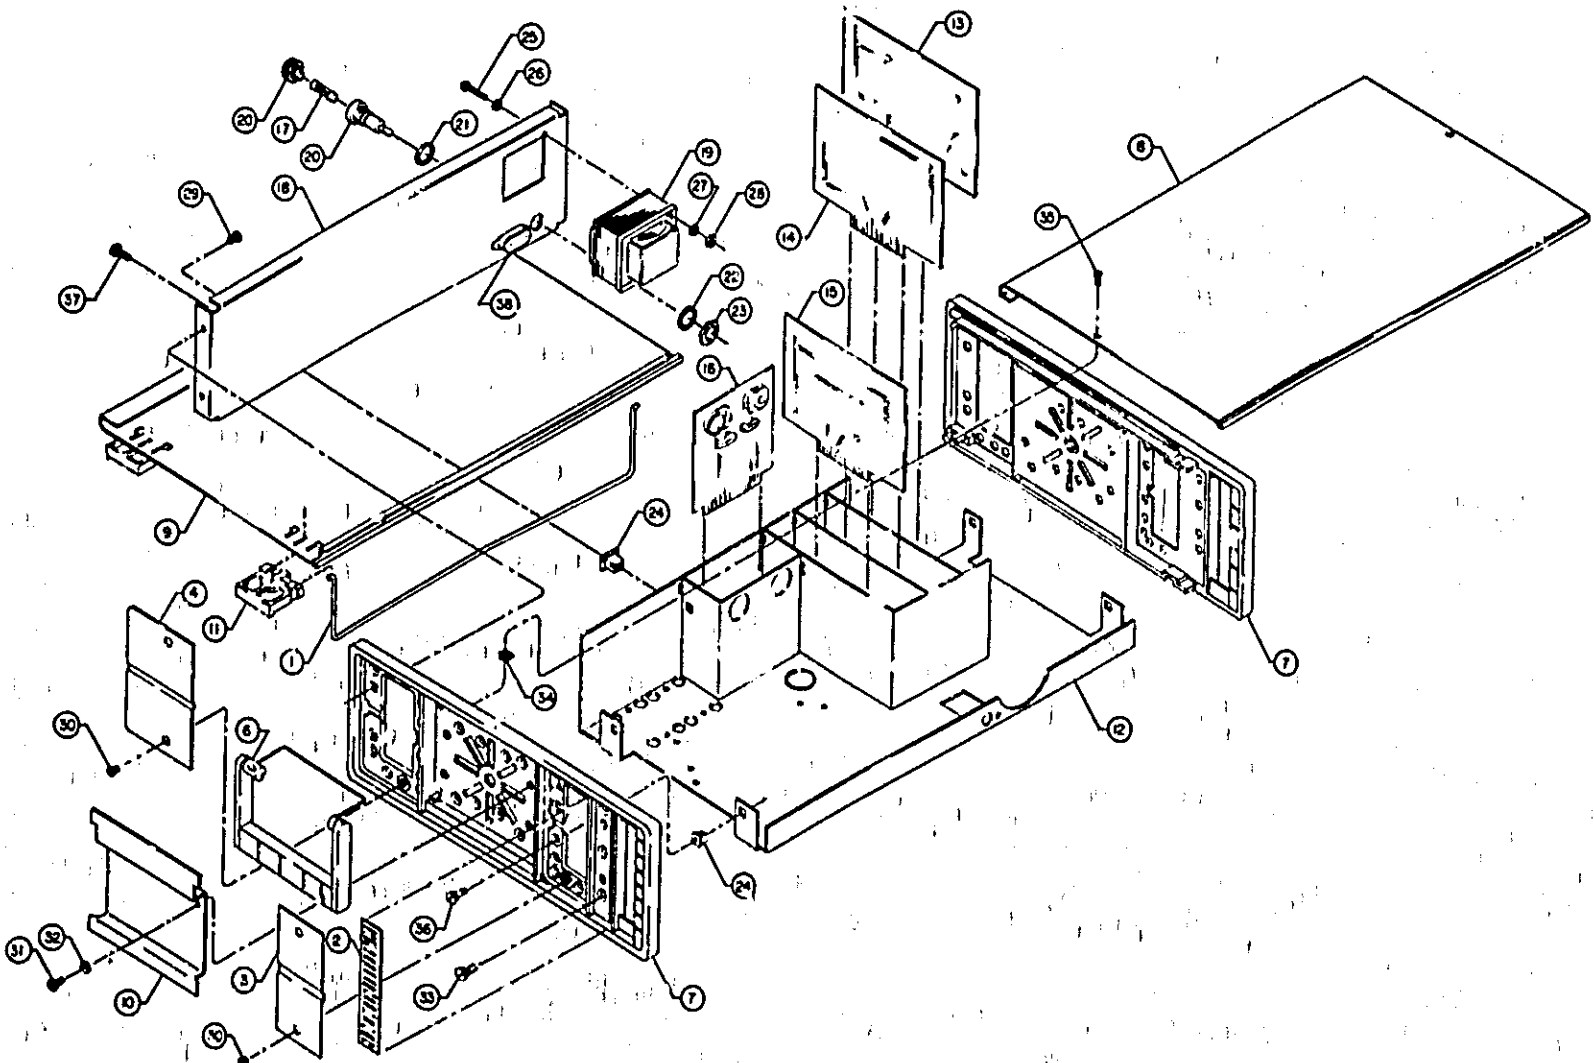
Exploded View of Chassis Assembly (U) (Sheet 1 of 2)
